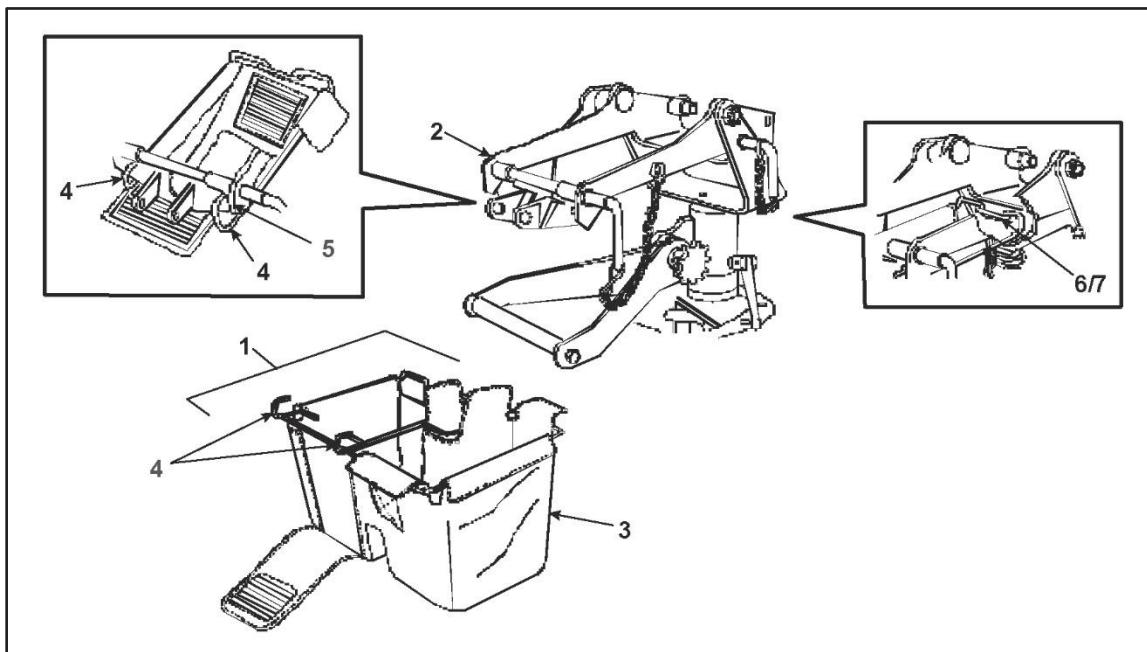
Weapon mounts: (1) 6650 mount, (2) MK64 mount, and MK93 mount
